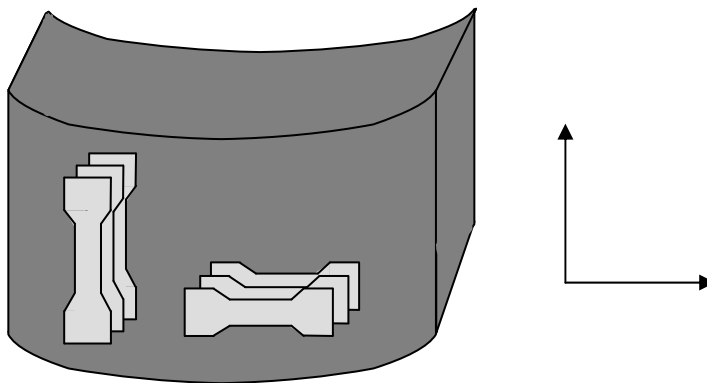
Sectioning of the miniature flat tensile Specimens: Längst (Longitudinal) (Specimens:xxL1-xxL10), Quer (Circumferential) (Specimens: xxQ1-xxQ10). Specimen 1 is the first specimen near the outer pipe segment surface and Specimen 10 is the one nearest to the inner pipe segment surface.
